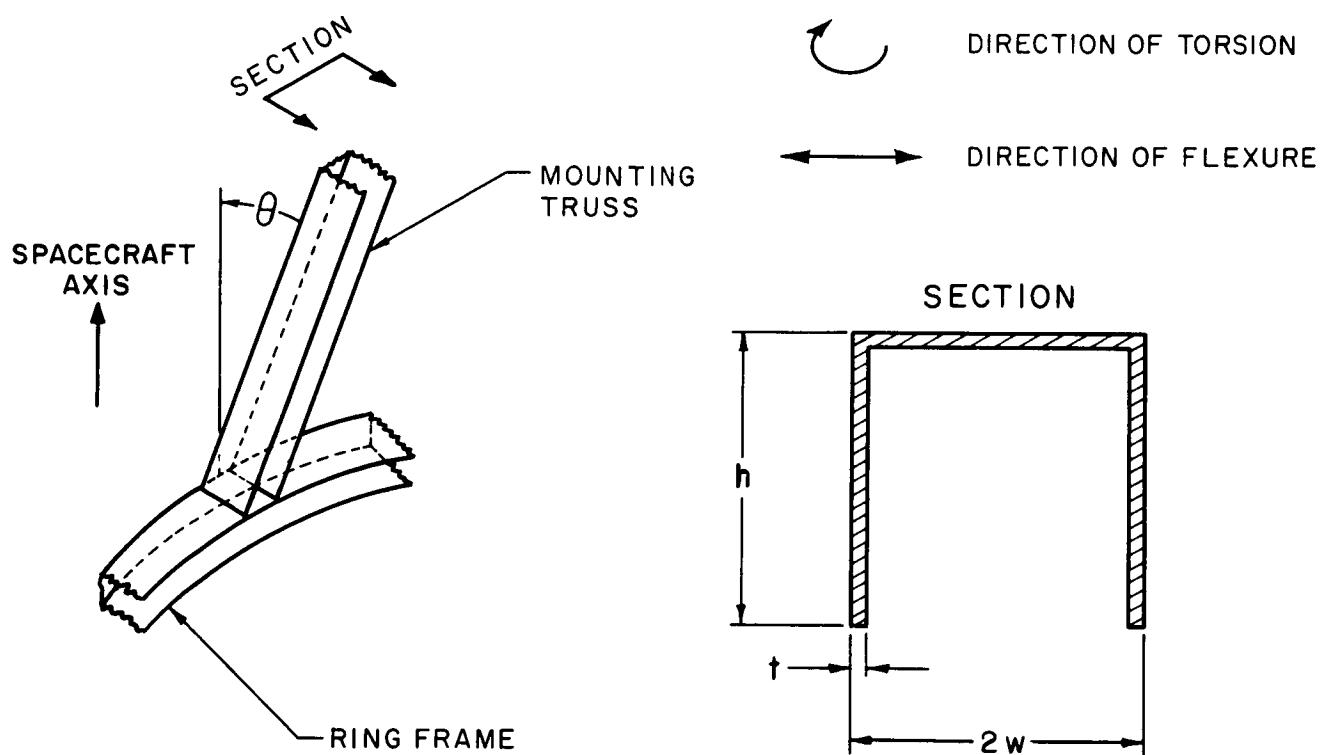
SINGLE CHANNEL BEAM MODEL OF MOUNTING TRUSS, ELEMENT (6)
